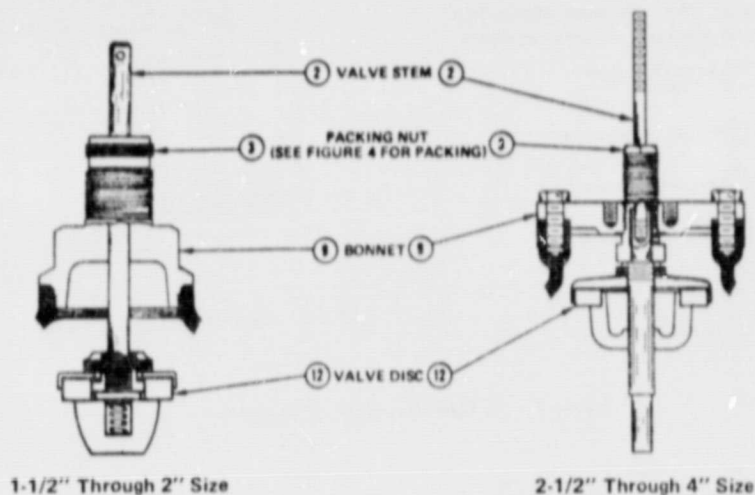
VALVE DISC REPLACEMENT, VP2510 VALVES
